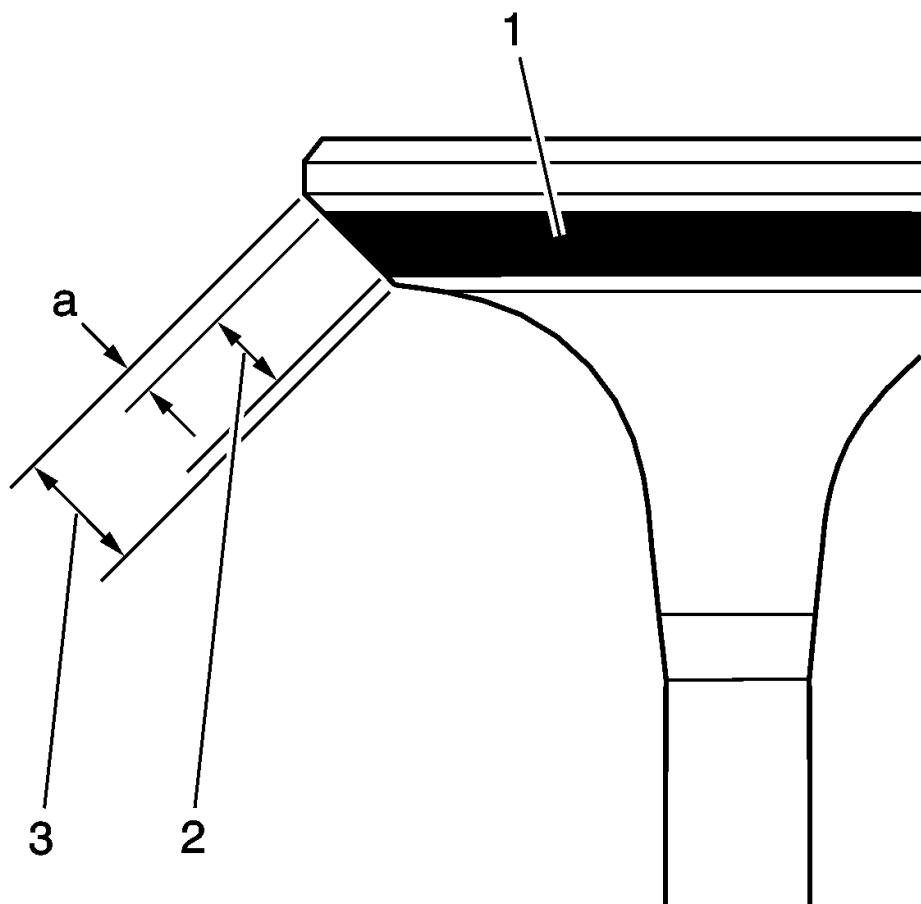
View Of Valve Head O.D. & Chamfer
